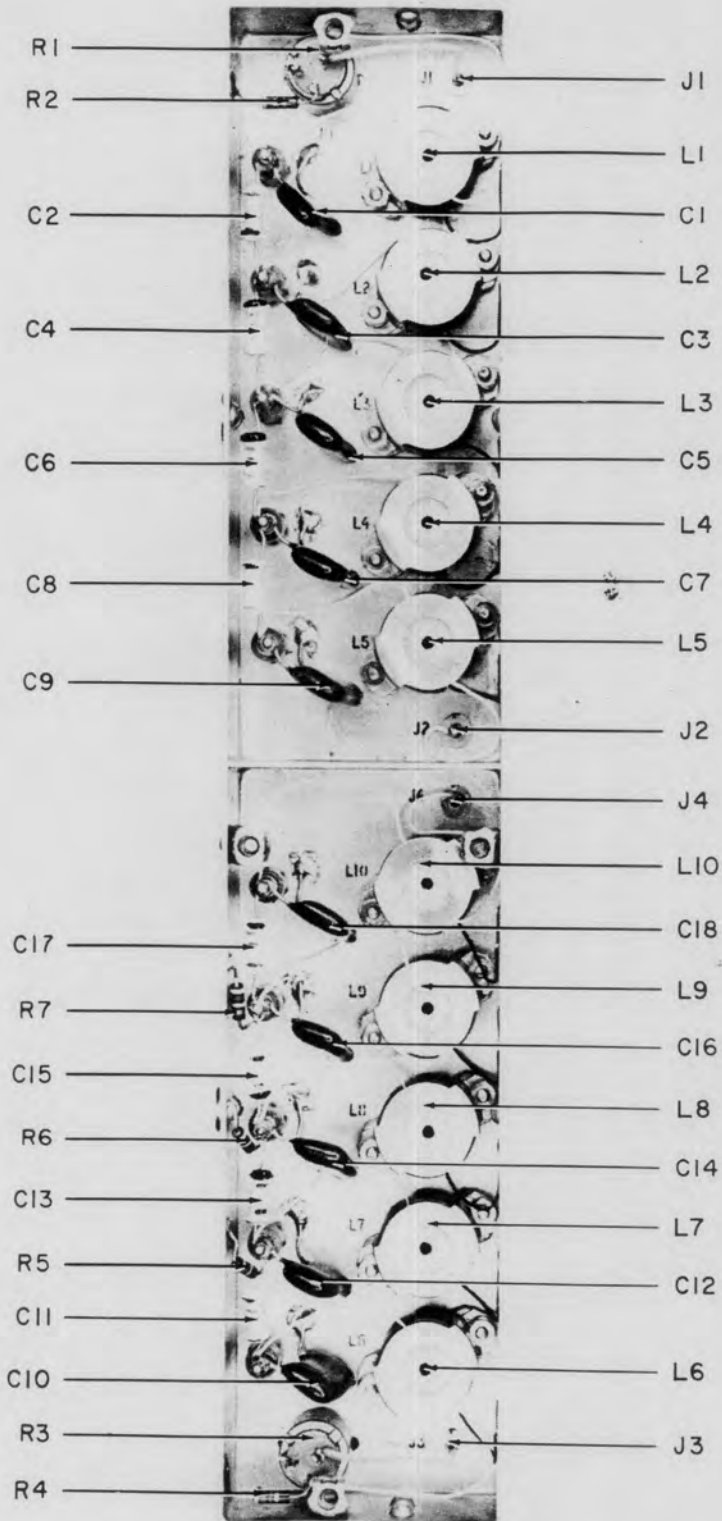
Type 7904 Filter Chassis, Component Locations
